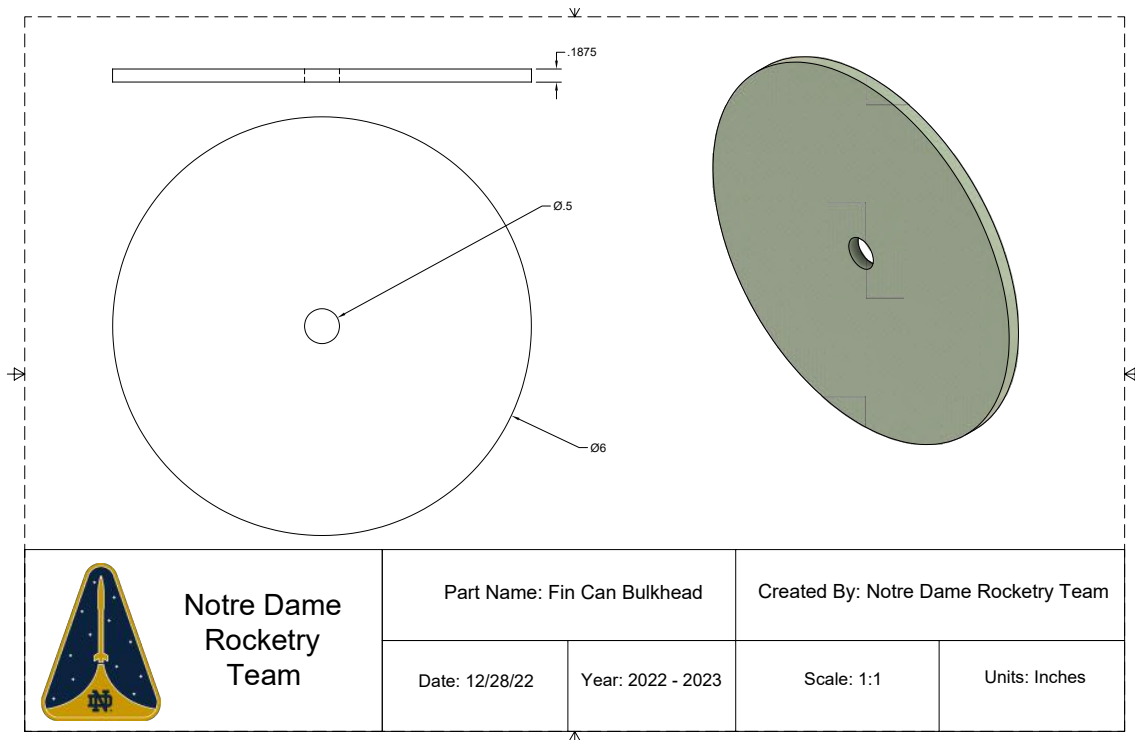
CAD Drawing of the Fin Can Fixed Bulkhead
